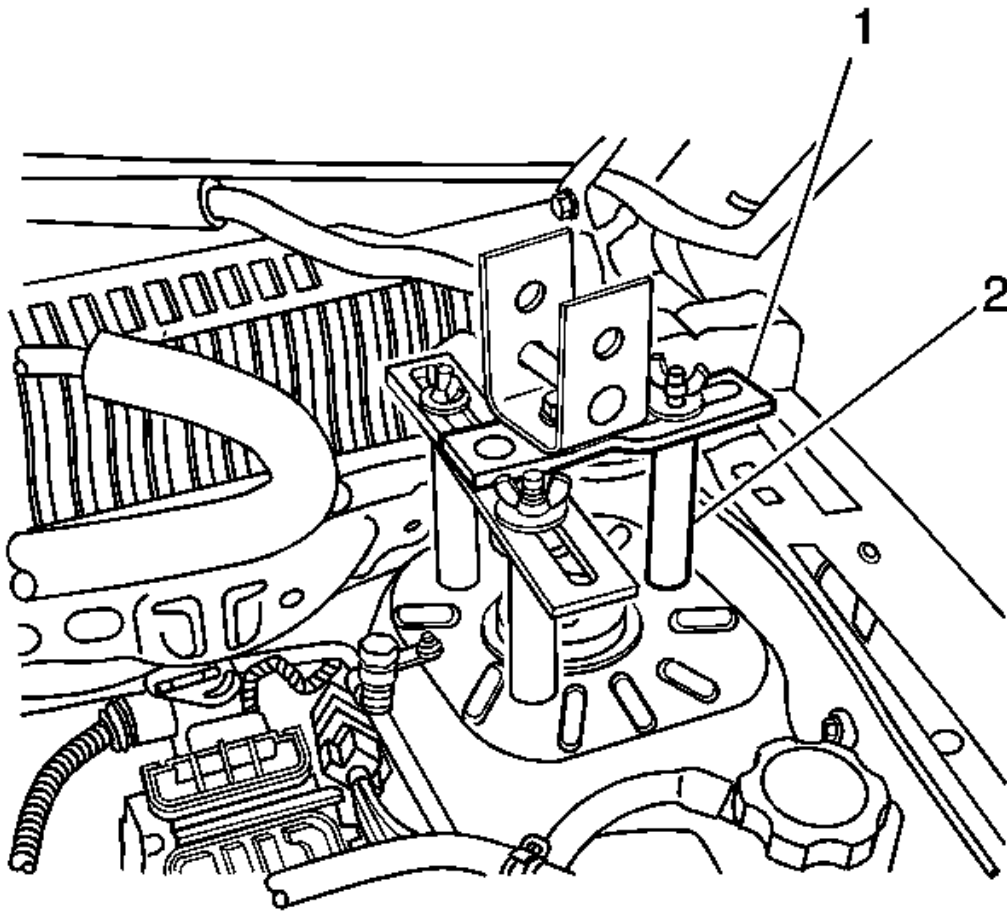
View Of J-28467-13 & J 28467-5 Strut Tower Adapter & Top Of Left Strut Tower
